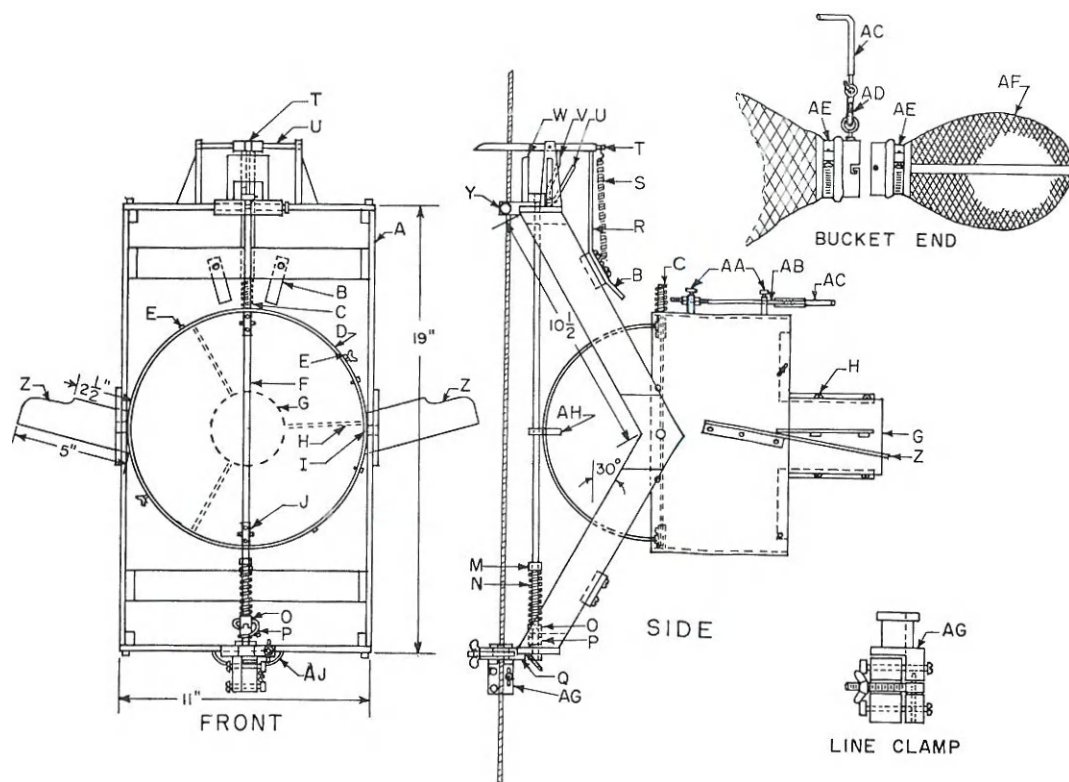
Enlarged Clarke-Bumpus plankton sampler and improved line clamp. See Parts List below.
